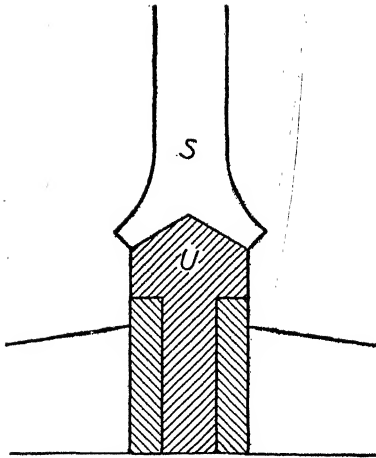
Vertical Section of Lower Part of Wheel Shaft and Wooden Step Bearing
